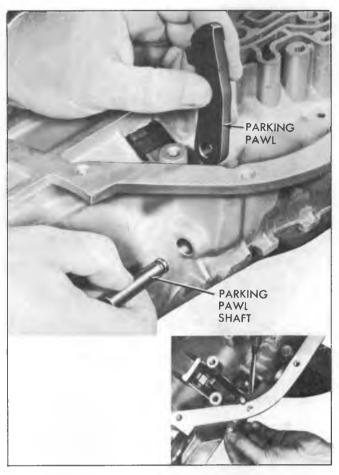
T--Removing Parking Pawl, Shaft and Cup Plug
